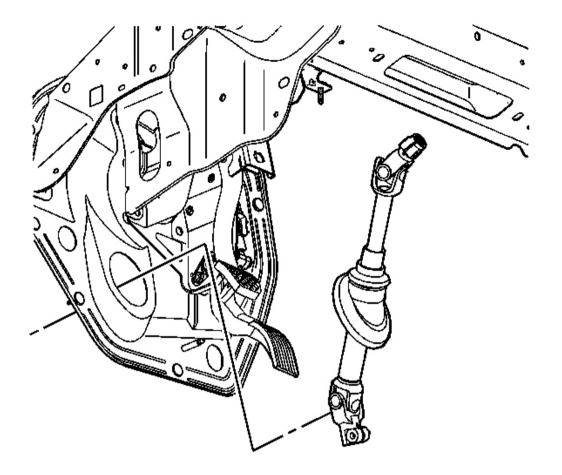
Inside Intermediate Steering Shaft Assembly Courtesy of GENERAL MOTORS CORP.
